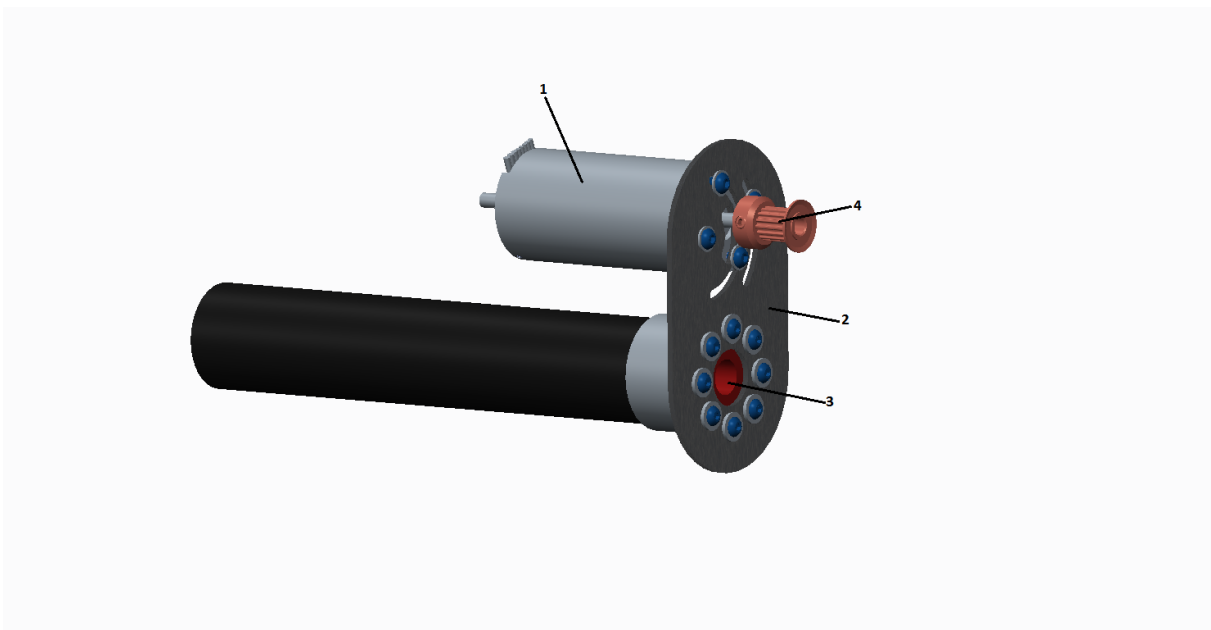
Base robot link 4 with exploded view. Technical drawings for labeled components are provided in Appendix A.
